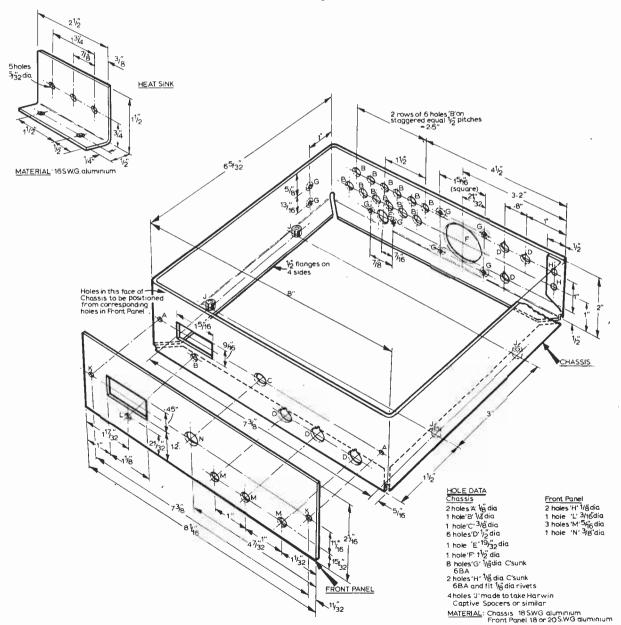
Details of chassis construction and drilling with the heat sink shown top left, front panel left.
